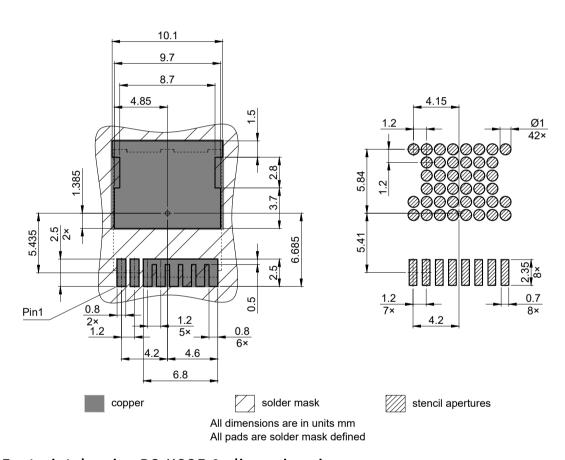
Footprint drawing PG-HSOF-8, dimensions in mm
